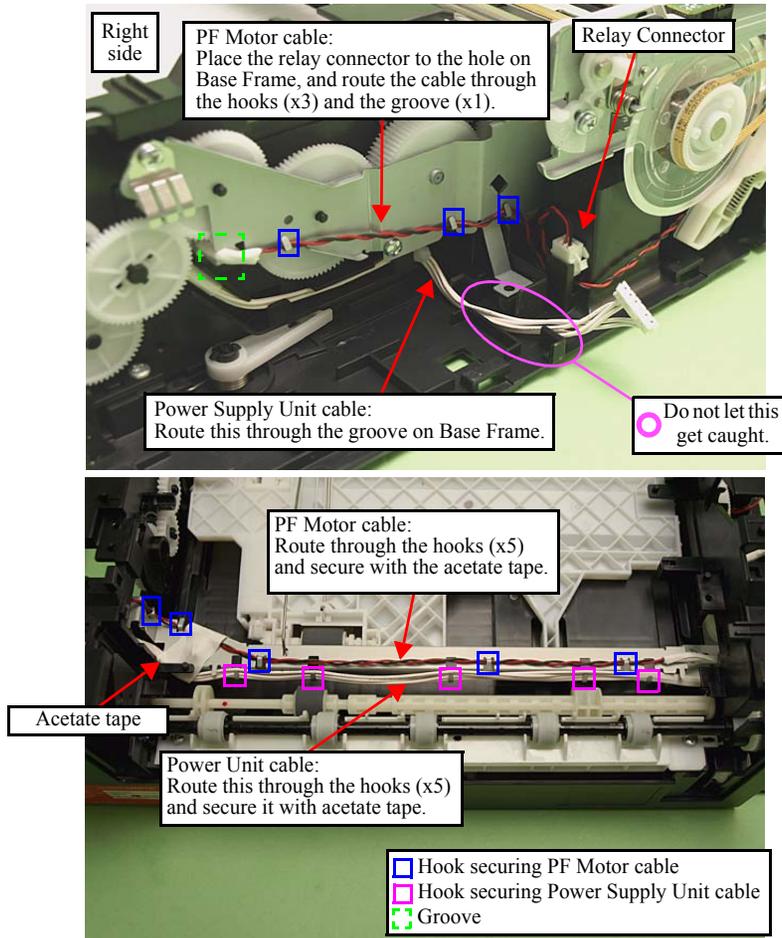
PF Motor Cable, Power Supply Unit Cable
